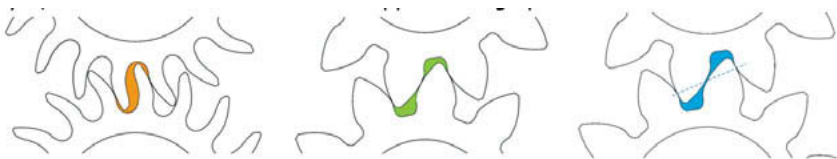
Comparison of tooth profiles with the special asymmetric gear tooth profile (left), dual-contact flank (center), standard gear (right)
